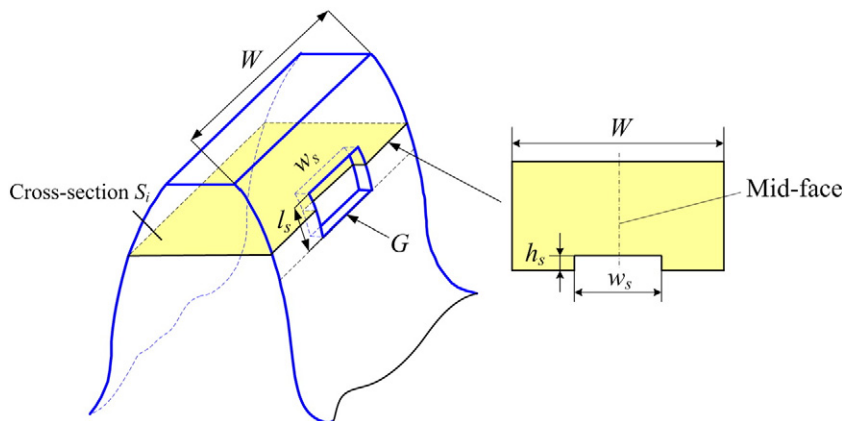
Shape change of the cross-sections  $S_i$  due to spalling [19].
